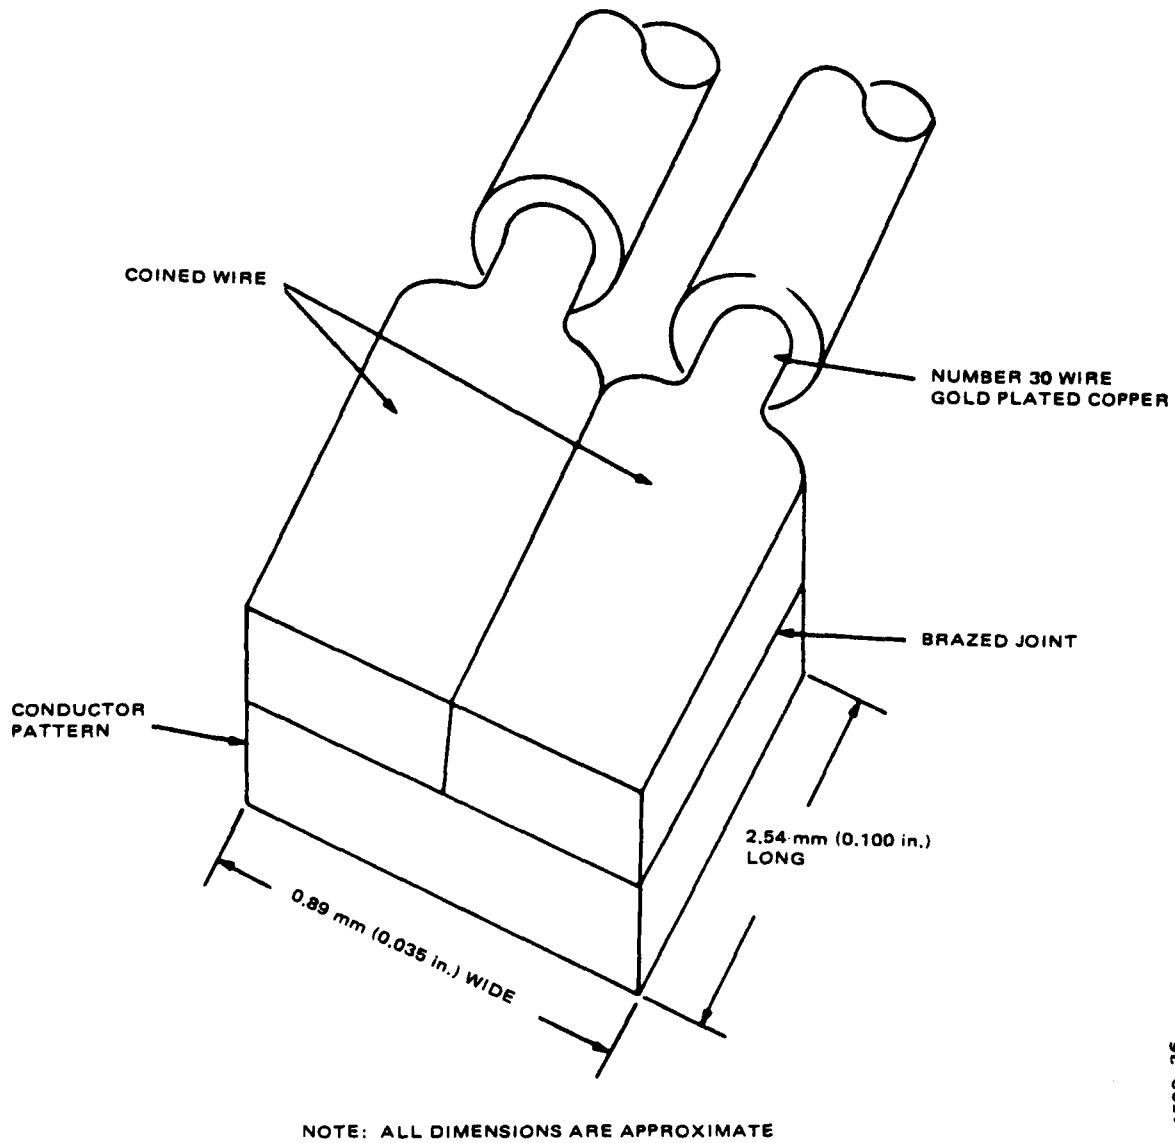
Double-Wire Attachment to Printed Circuit Pad
